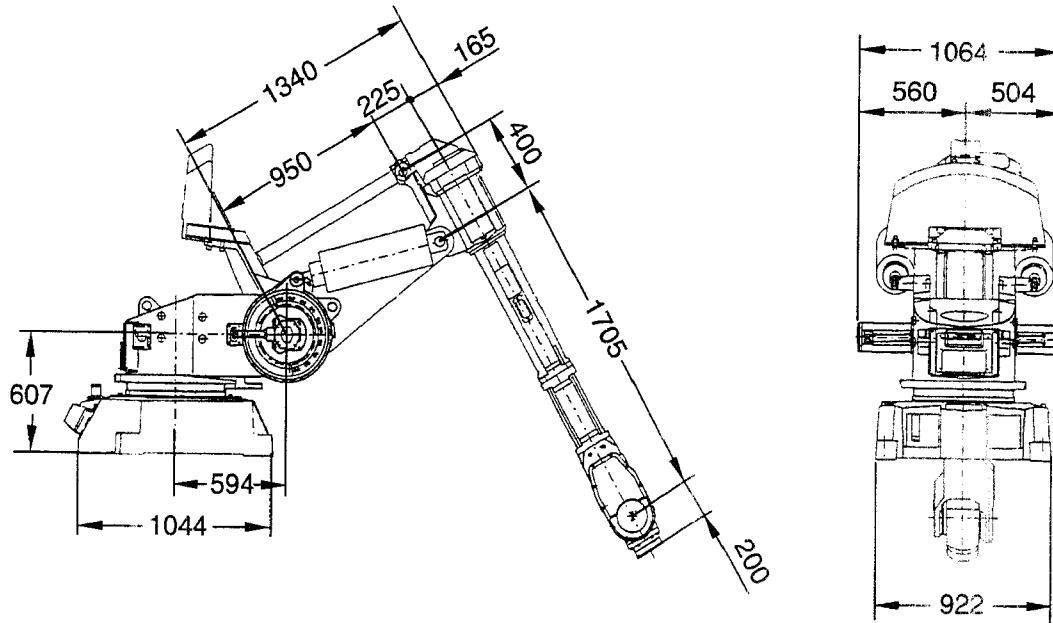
View of the manipulator from the side and rear (dimensions in mm).
